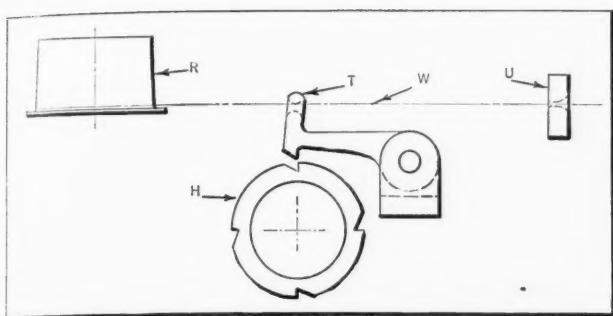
Clutch-tripping Arrangement for Wire Drawing or Similar Process
